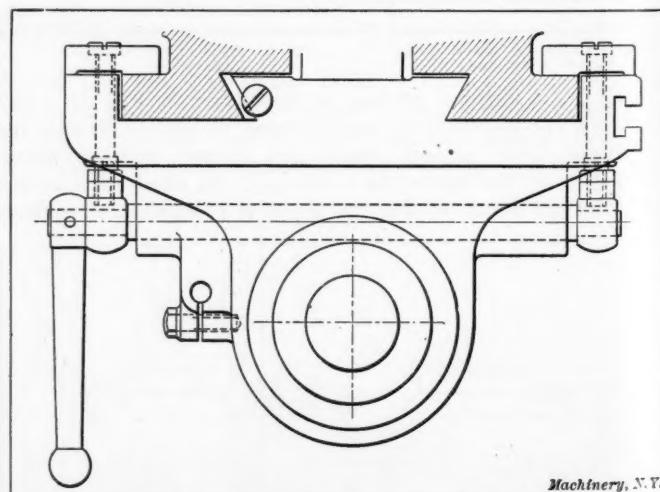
Eccentric Clamping Arrangement for Vertical Milling Machine Head
